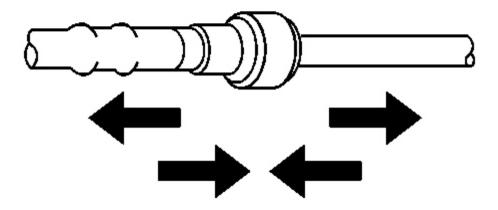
Ensuring Secure Connection (Metal Collar) Courtesy of GENERAL MOTORS CORP.
